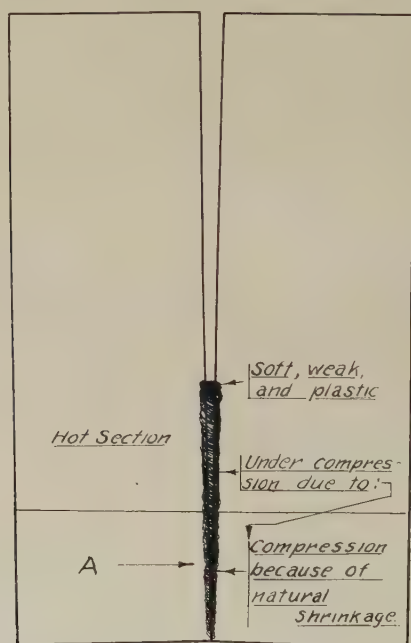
Illustrating the Shrinking of a Butt Weld.
